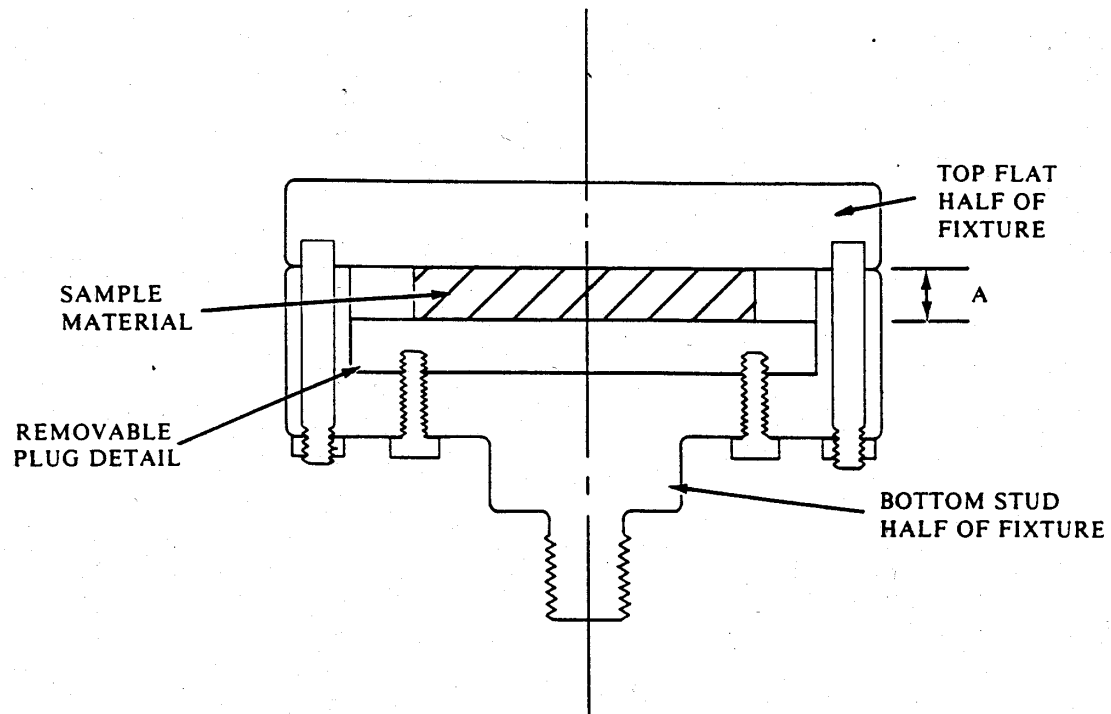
Cross Section of Compression Fixture with Specimen Compressed to Thickness A.
